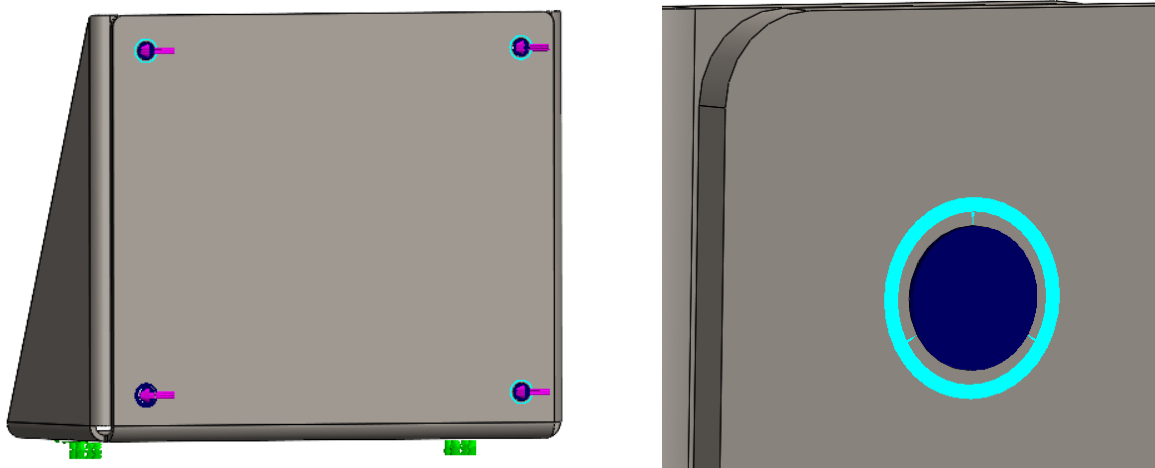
BRACKET 2 FIXTURES AND LOADING CONDITIONS (LEFT), PIN CONNECTION DETAIL (RIGHT).
